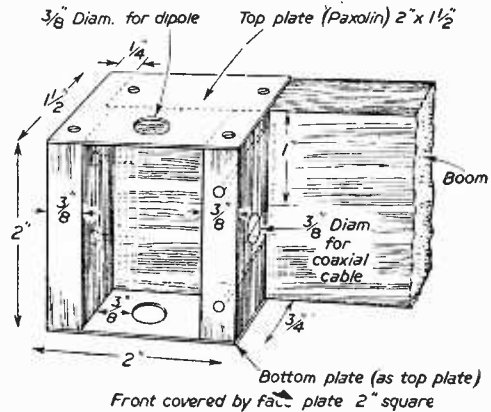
Details of the box used to enclose and weather-proof the connecting point
